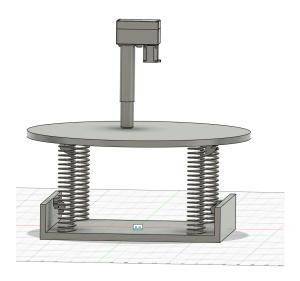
Jumping mechanism(Compressed position due to its own weight)
